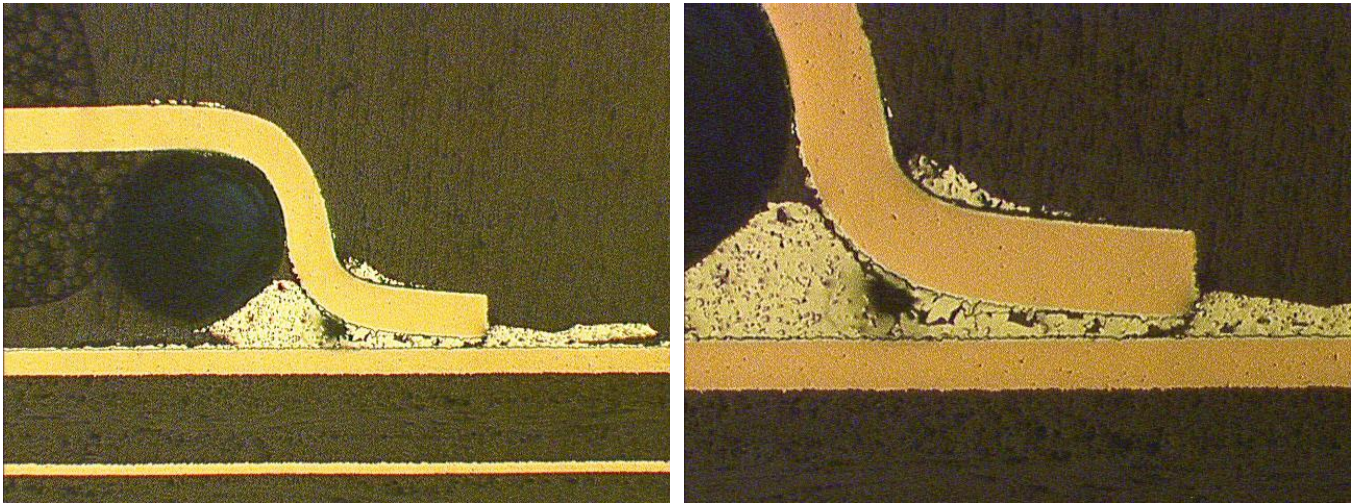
TQFP-144 Solder Joints, Board 106, Component U20, SN100C/SnPb Dipped, Failed @ 3258 Cycles
